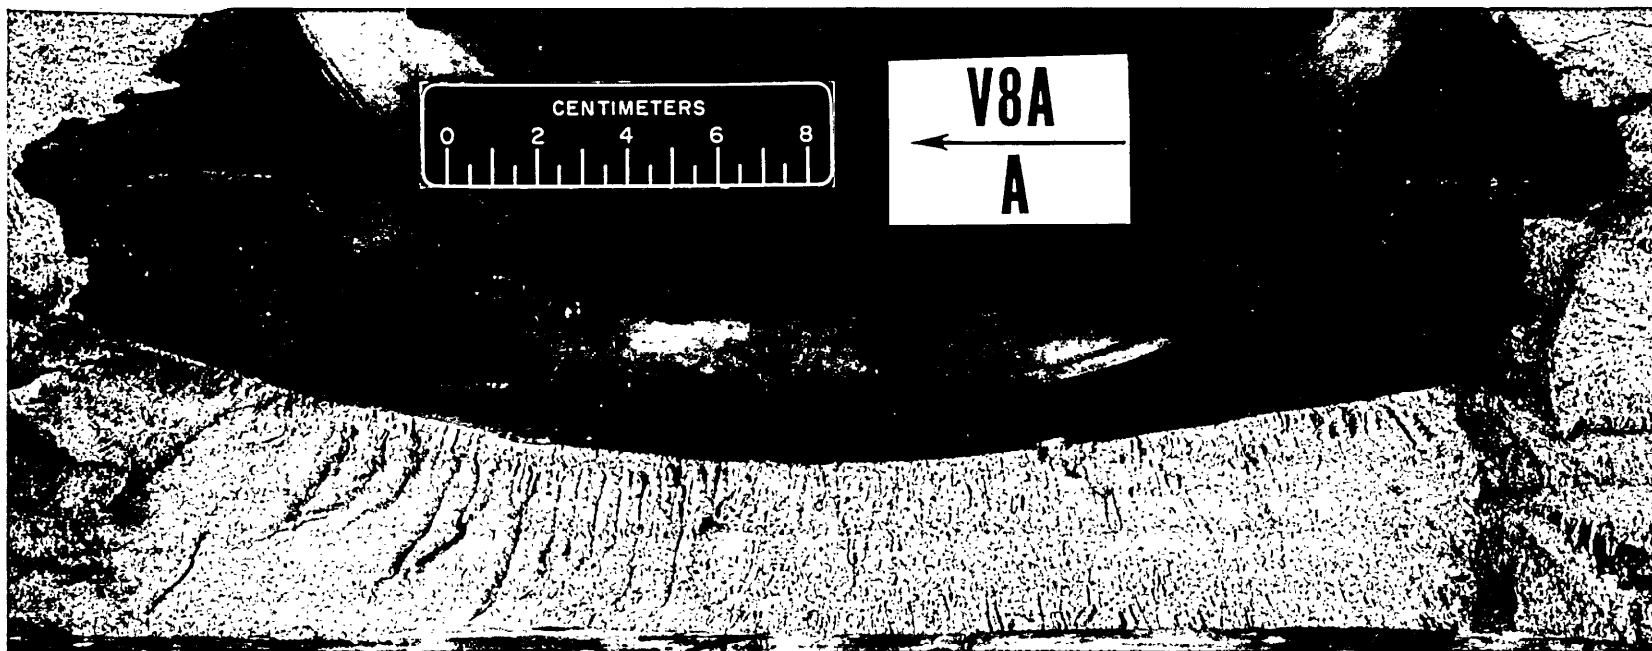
Fracture surface V8A-A as revealed by the initial cold fracture of the flaw block.
